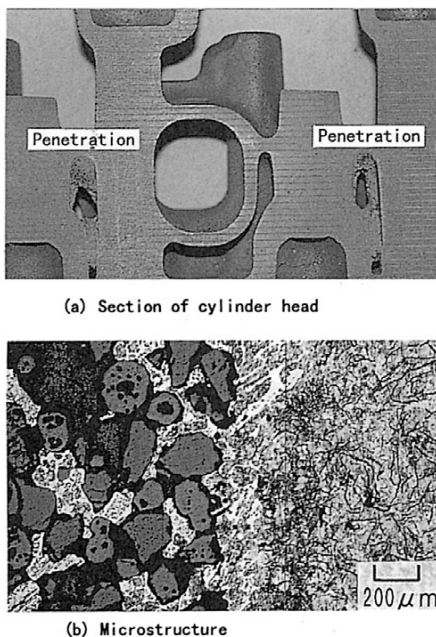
Cylinder head casting with penetration caused by Te coating.
